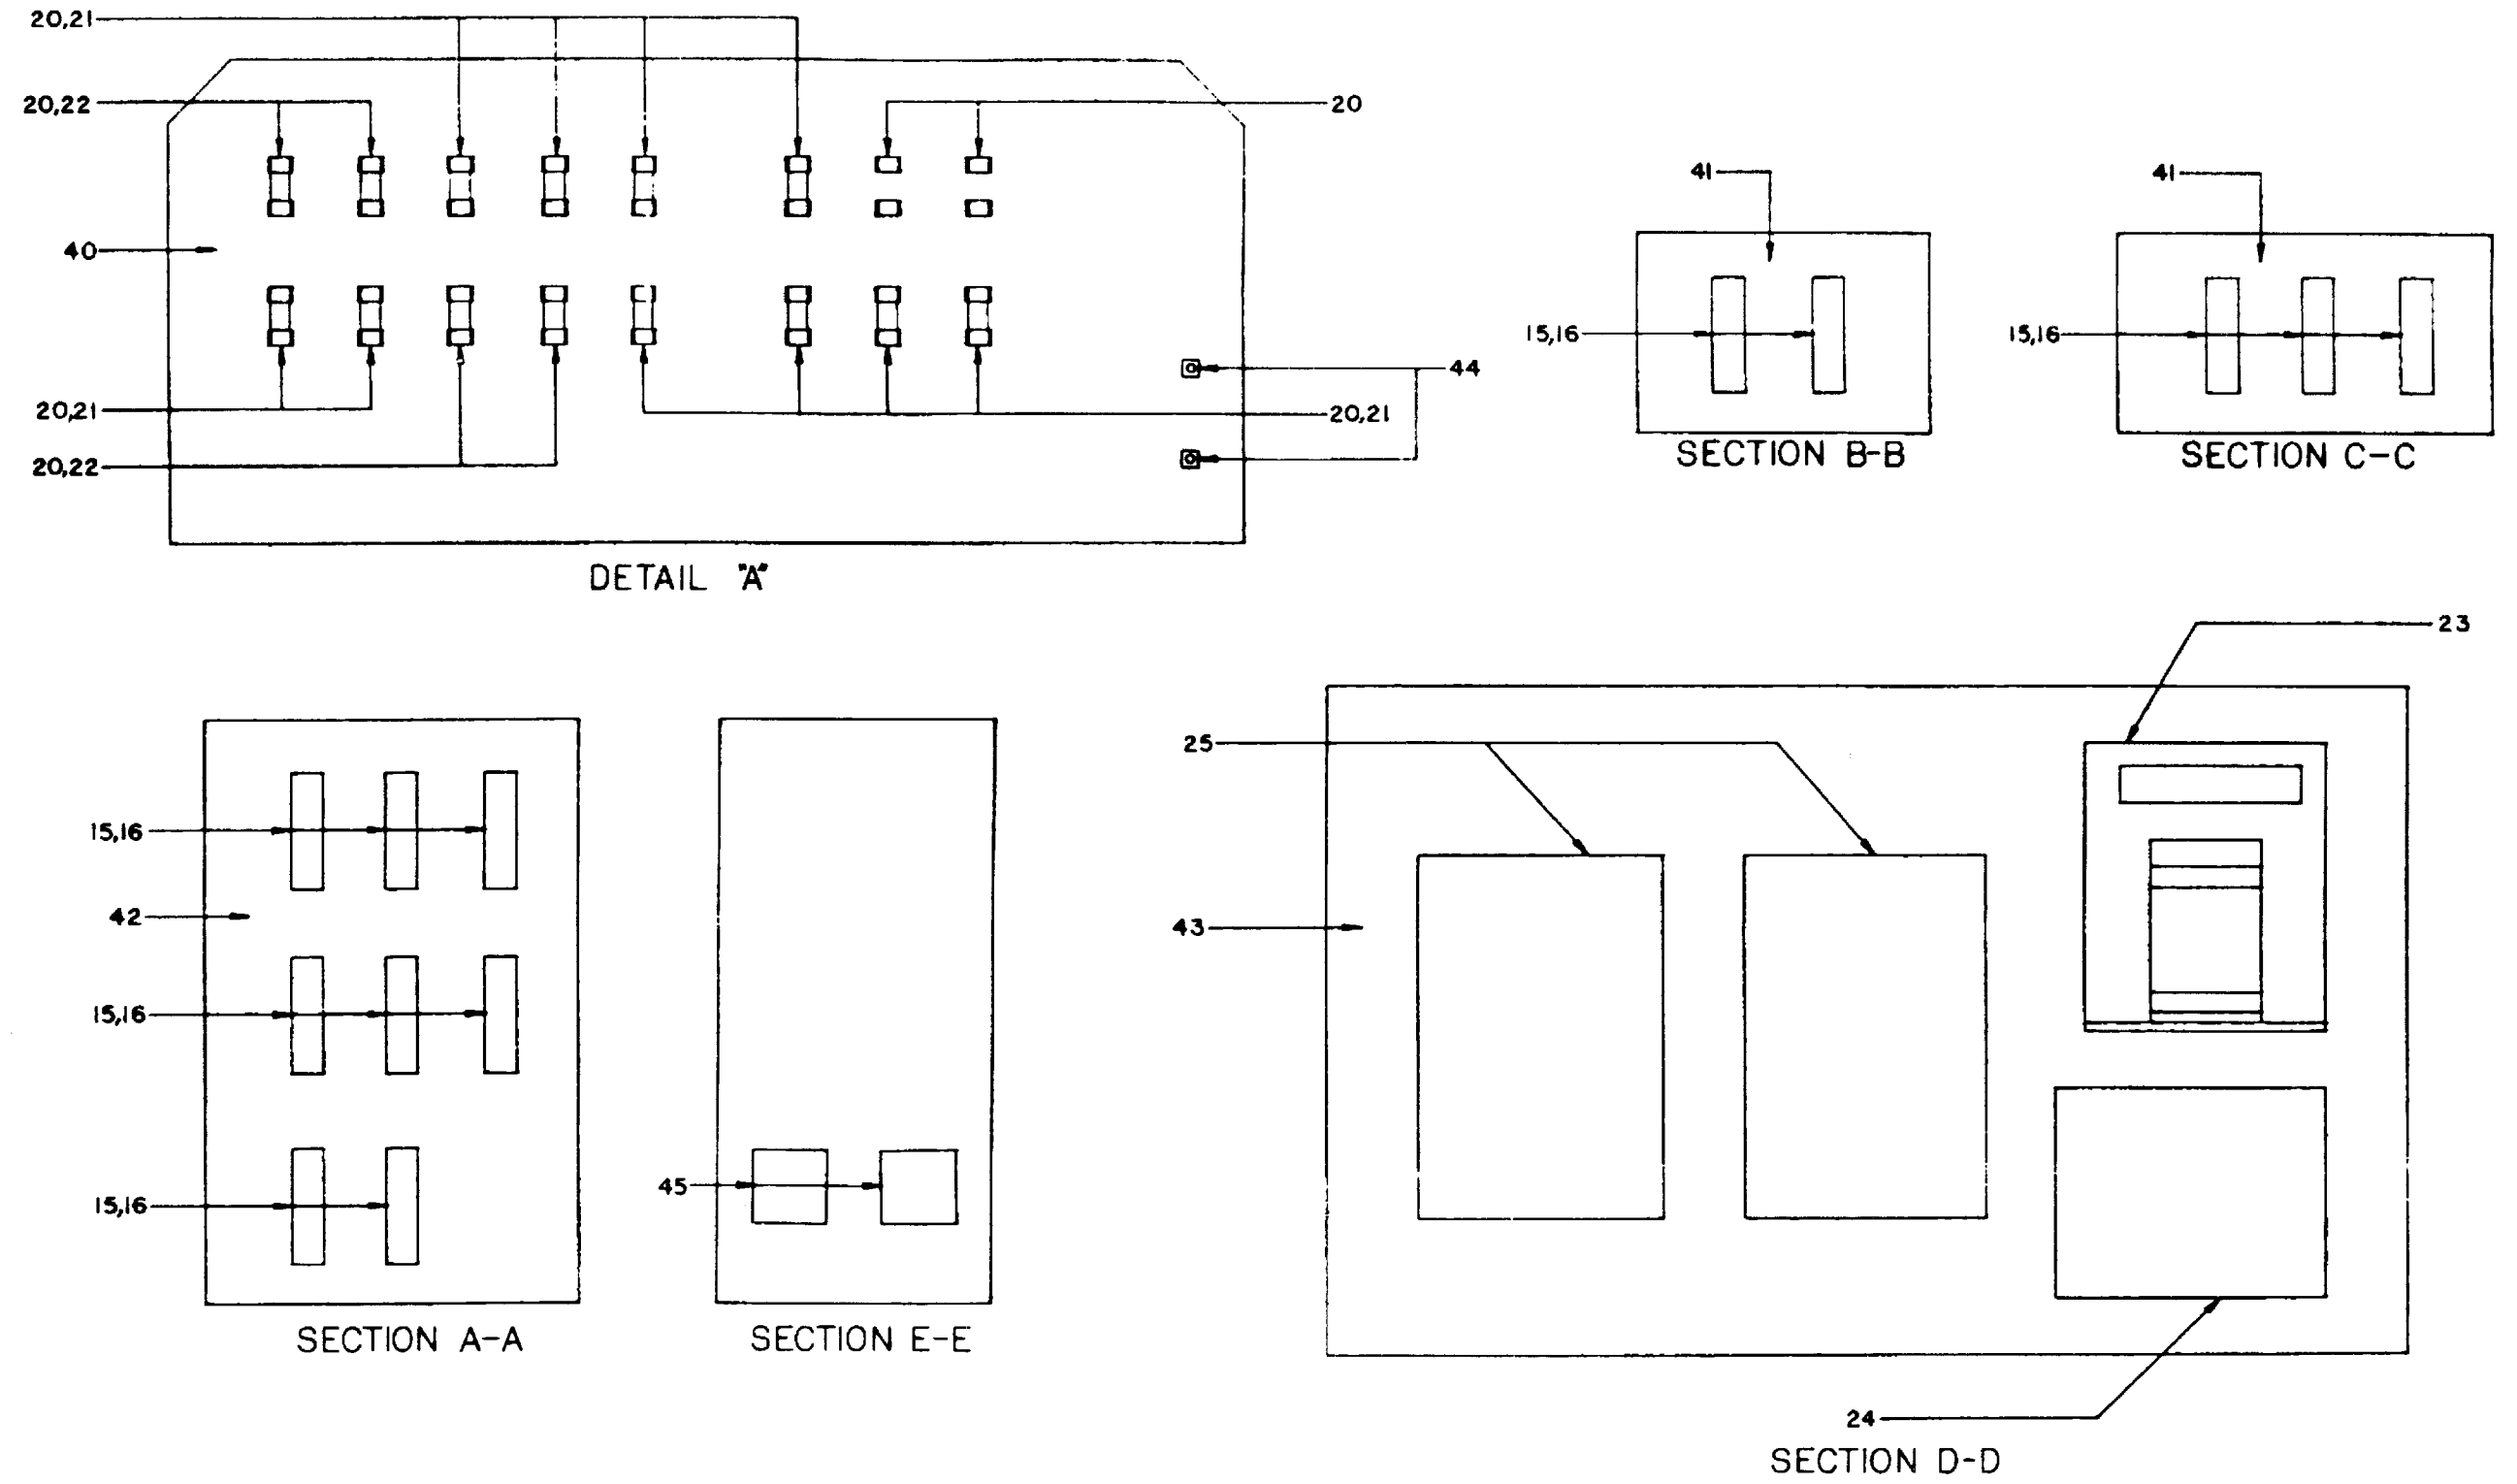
ISA Switchboard Assembly (Sheet 2 of 2)
